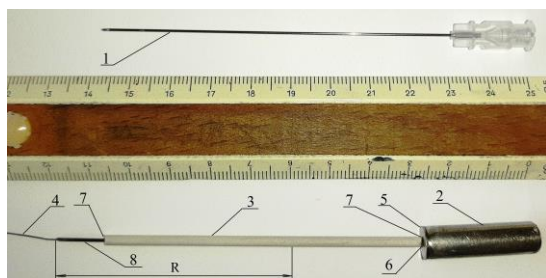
Appliance for measurement vacuum in a shrinkage cavity: 1 - medical spinal needle \varnothing 0.7 mm x 90 mm; 2 - steel tube with the outer \varnothing 8 mm and wall thickness 1 mm; 3 - tube; 4 - wire \varnothing 0.2 mm; 5 - steel plug; 6 - zone of head welding 1 with steel cork; 7 - zone of sealing with ceramics gap between mullite silica tube 3 and head 1; 8 - part of the head without thermal insulation; R - depth of introduction into liquid metal, 60 mm
